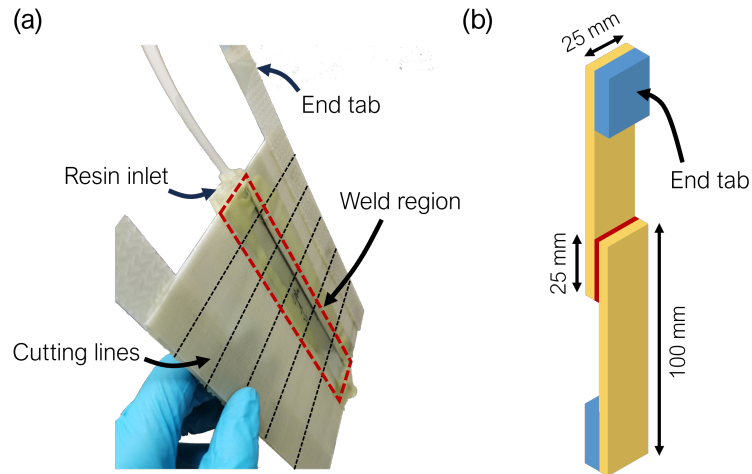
(a) A prepared weld with lines depicting where coupons are cut in black, and the weld region highlighted in red. (b) The single lap coupon geometry with tabs applied.
